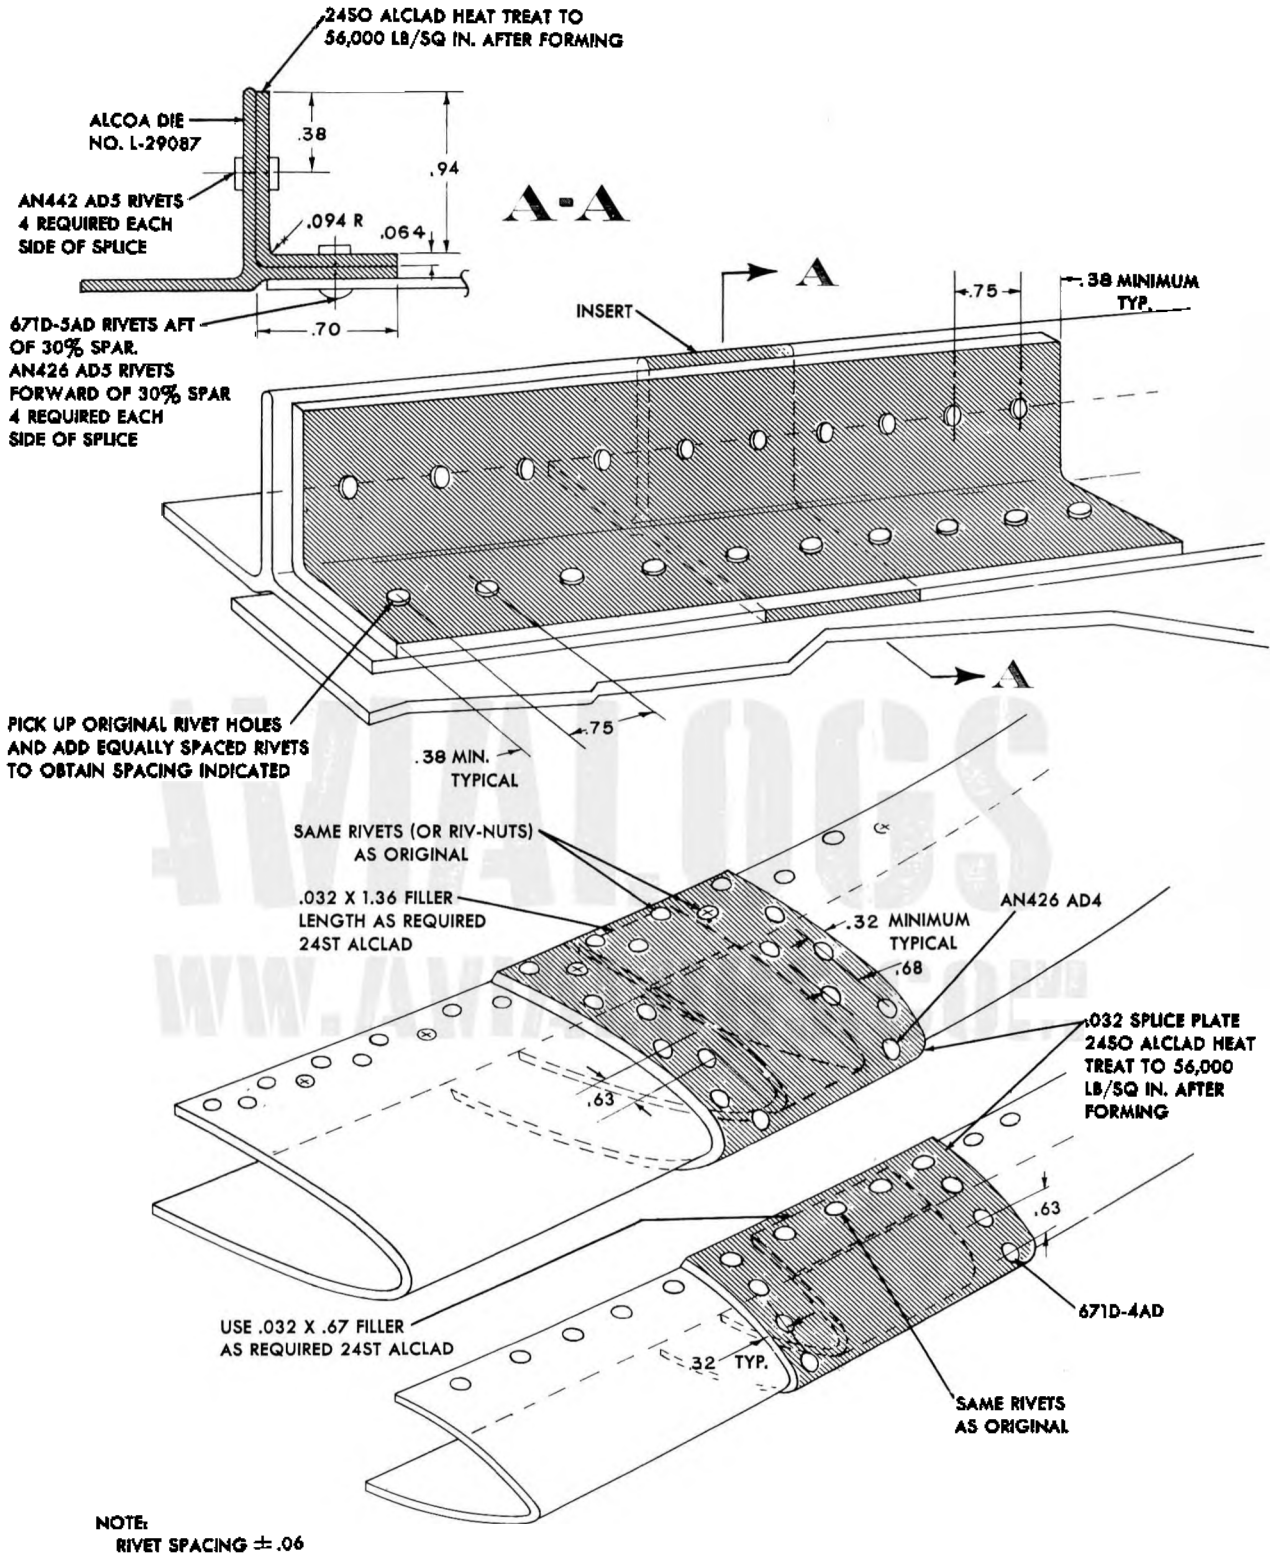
REPAIR TO WING TIP MATCH ANGLE AND MOLDING
